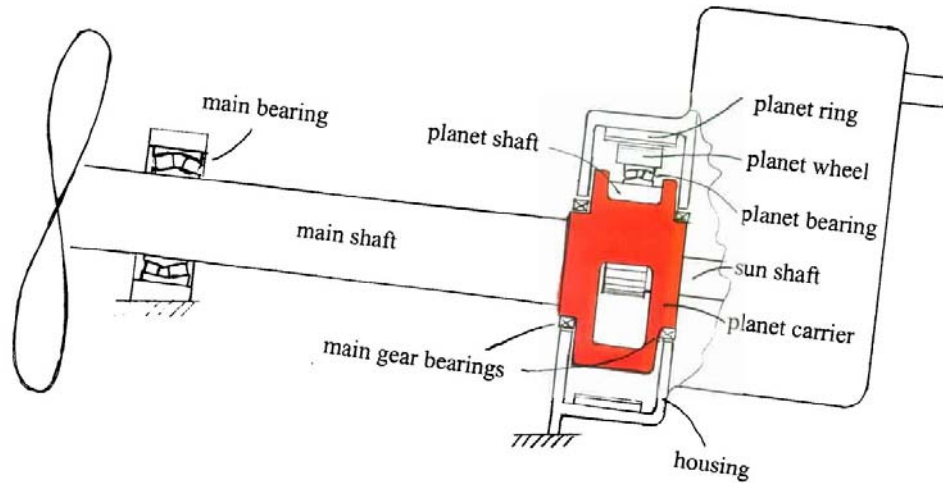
Illustration of drive train with one planetary bearing for each planet wheel.
